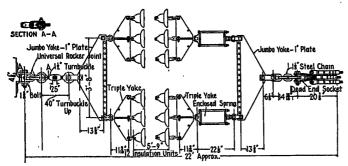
Assembly of Conductor Insulating Supports for Anchor Tower
